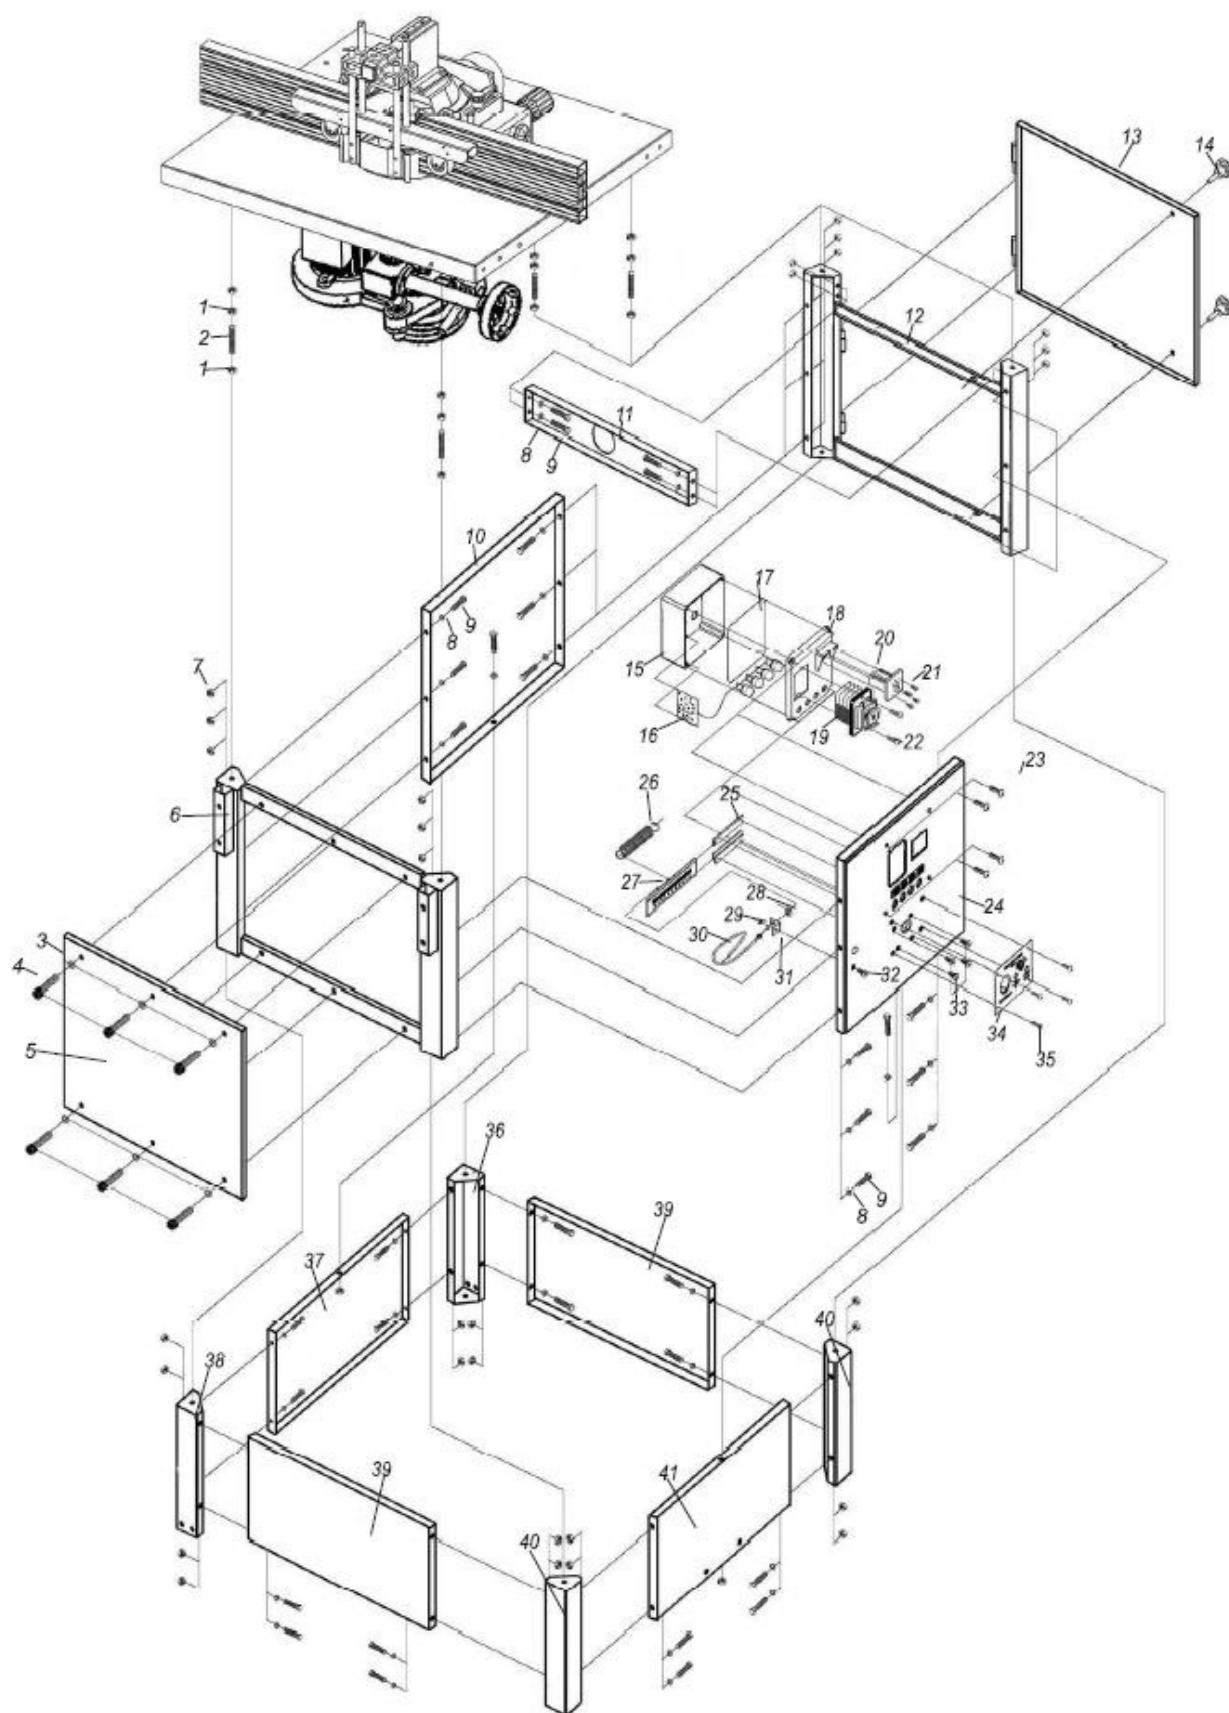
Spare parts drawing 4 - Table router TF 190 E
